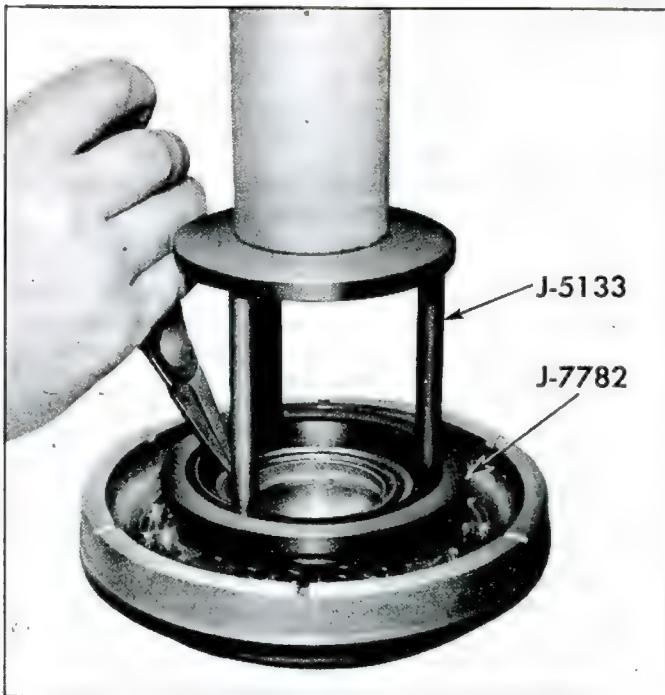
E-41—Removing Reverse Piston Return Spring Retainer with J-5133 and J-7782
